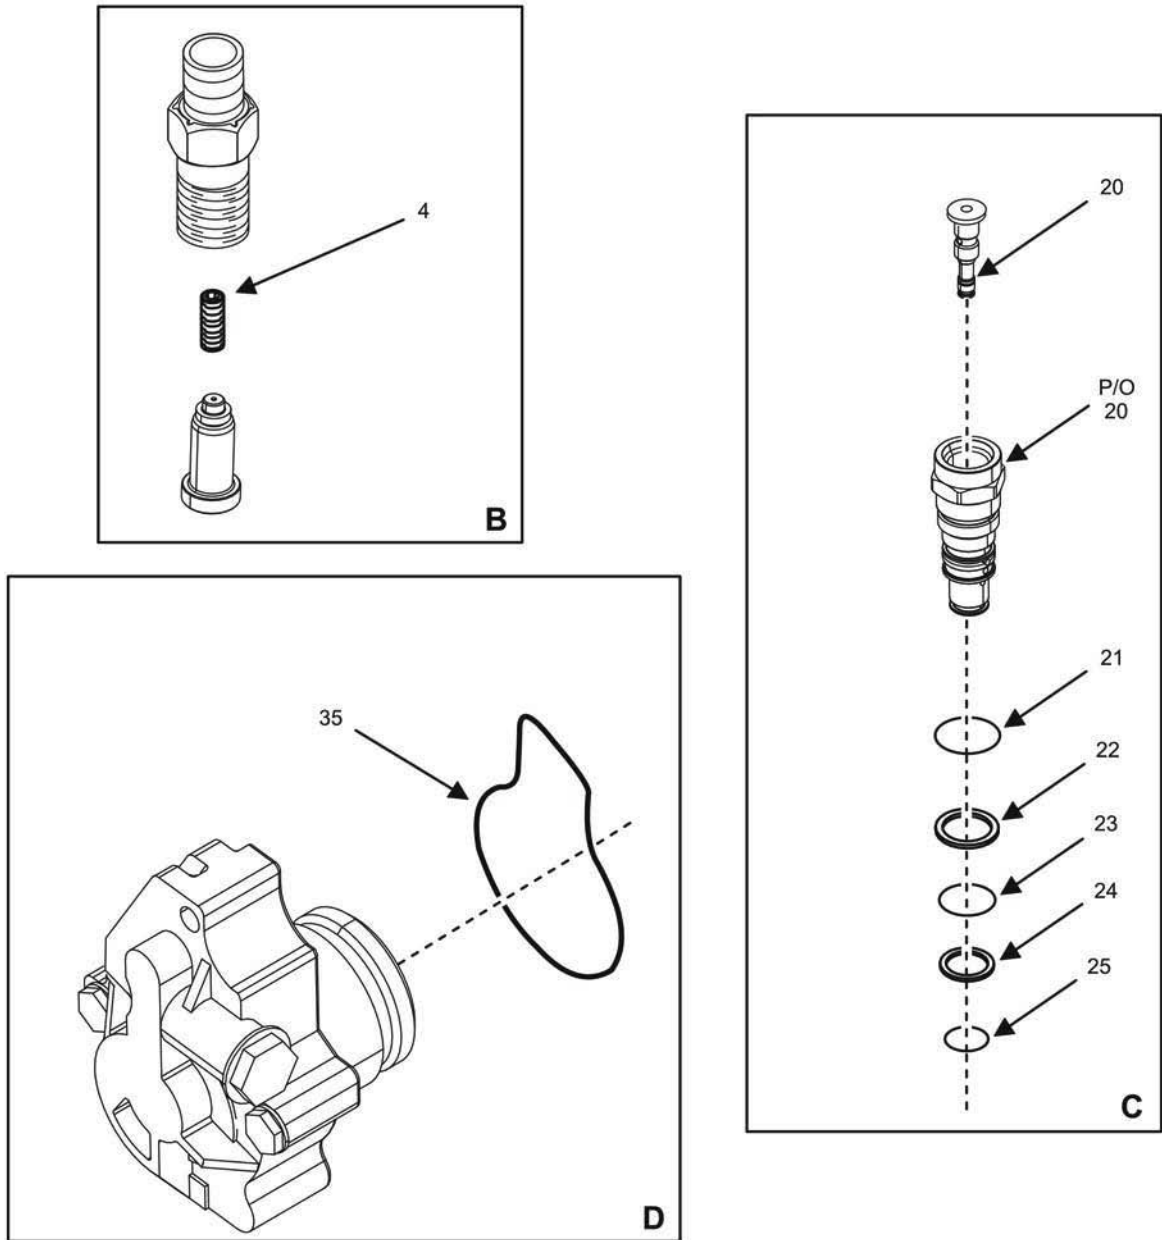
Fuel Injection Pump (Sheet 3 of 4).
